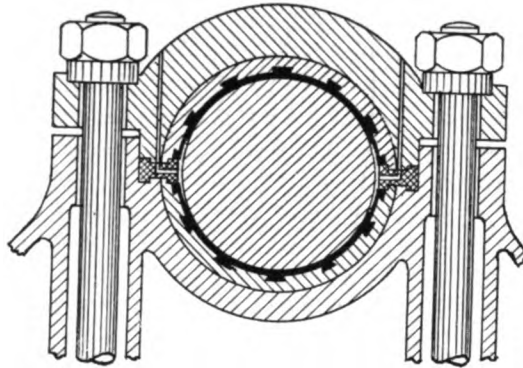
LUBRICATION OF MAIN OR CRANK-SHAFT BEARINGS.
